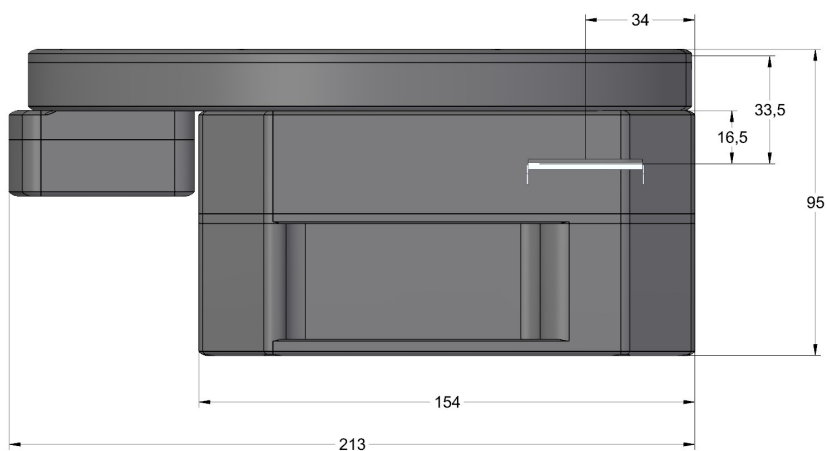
G3 camera with enhanced cooling and “S” size external filter wheel side view
